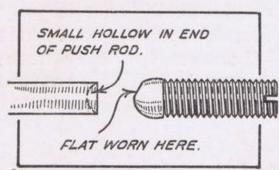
Wear at End of Clutch PUSH ROD AND PIN.
